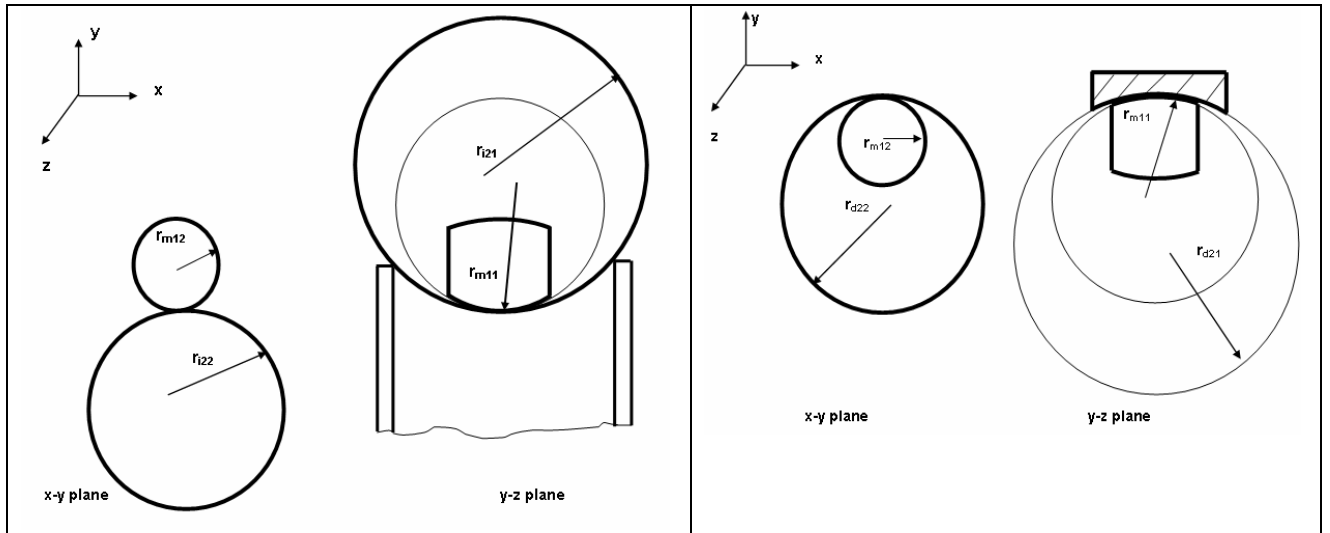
The equivalent curvatures between the inner ring and roller and the outer ring and roller for spherical roller bearing [5].
